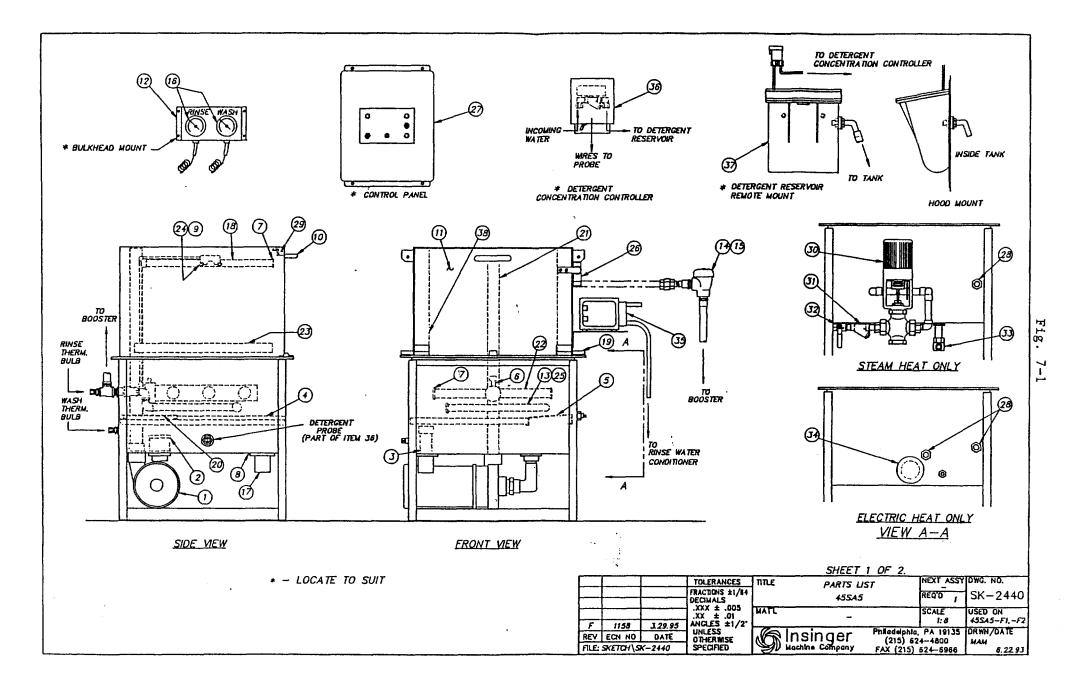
Parts List Drawing - Sht 1 of 2 SN 938043 and higher
